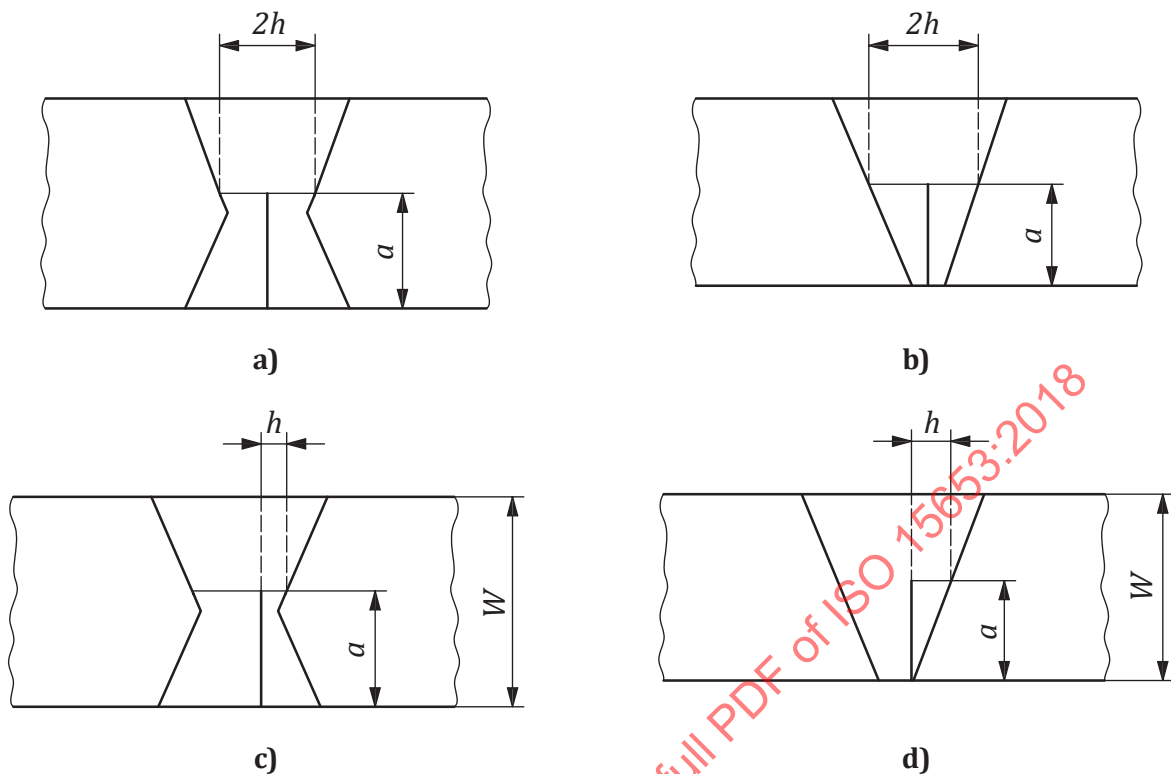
Definition of h and $2h$ in surface-notched (NQ) specimens from double- and single-sided welds
